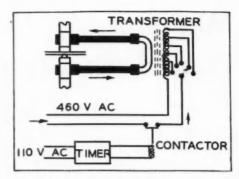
Schematic drawing of the transformer circuit for the resistance-heating electrodes and dimpling tools.
